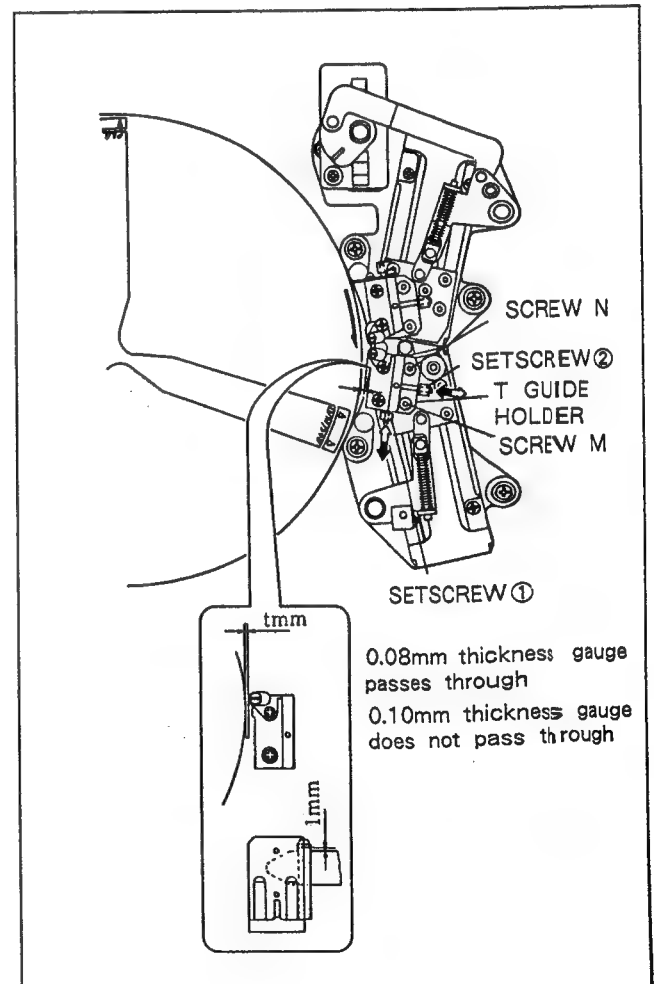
Exit Slant Guide/Upper Drum Clearance Adjustment
